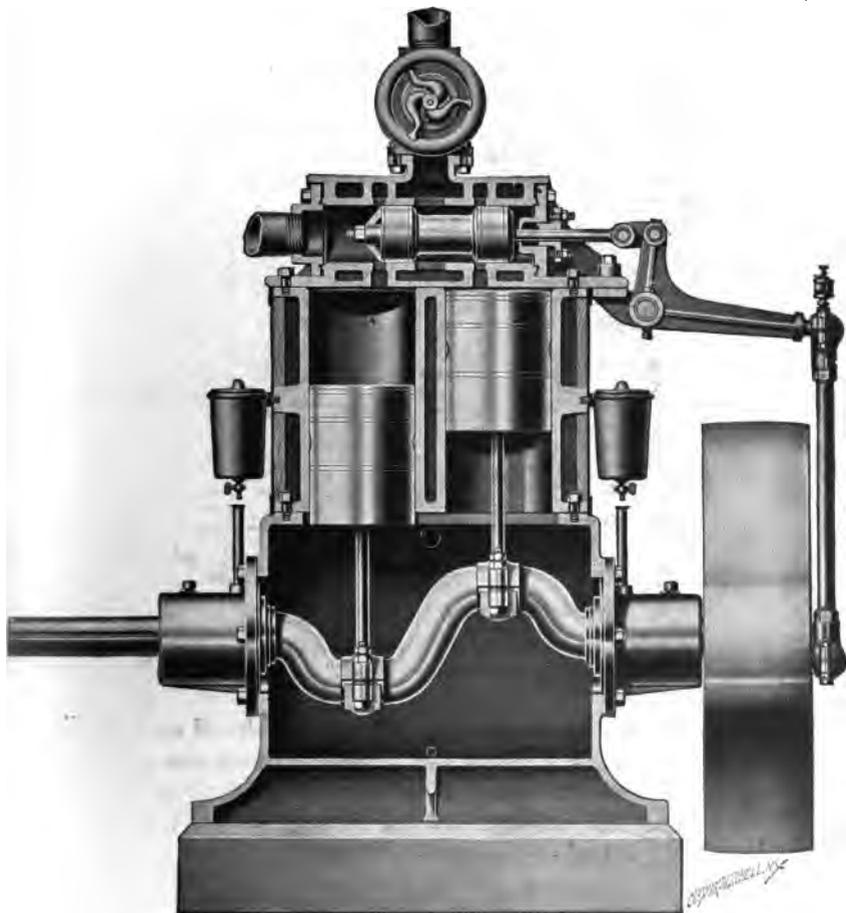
SECTIONAL VIEW OF "JUNIOR" ENGINE.
